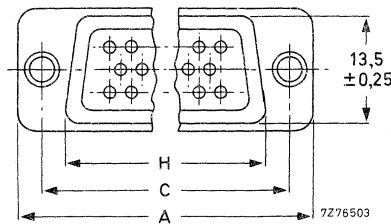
Terminal side of pin (or socket) connector; see also Table 5.
